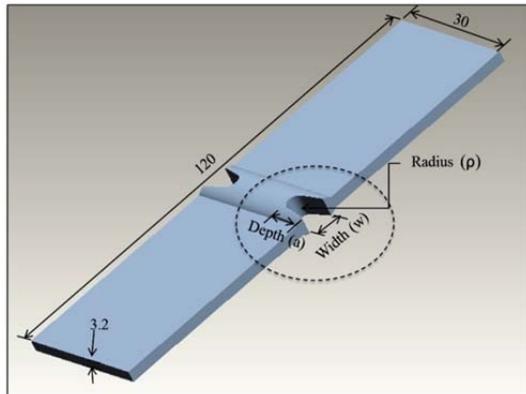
Geometry of Welded Double Edge Notched Tensile (DENT) specimen (all dimensions are in mm).
